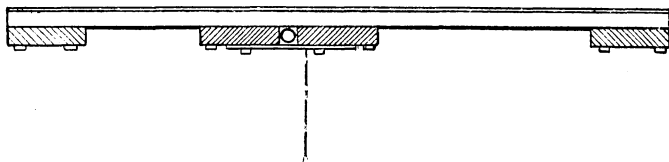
Vertical section of an older style of automatic trap, showing 2-in. iron pipe upon which trap is pivoted.
